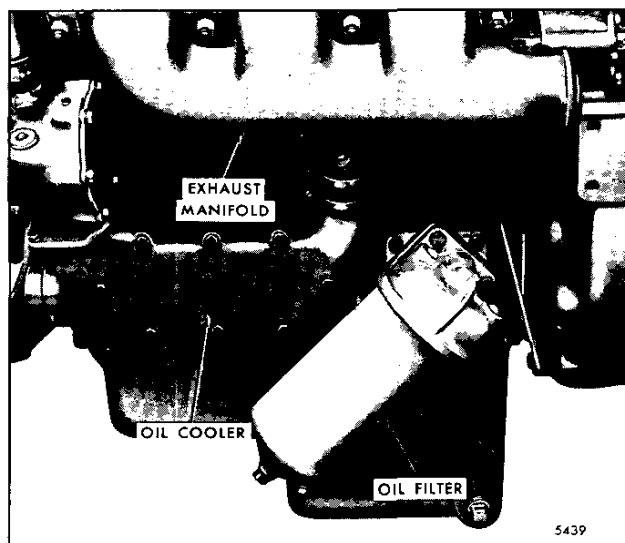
Typical Oil Cooler Mounting (6V Engine Shown)
